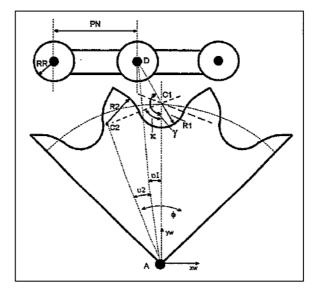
Geometric parameters of the profile of a gear for roll chain.
